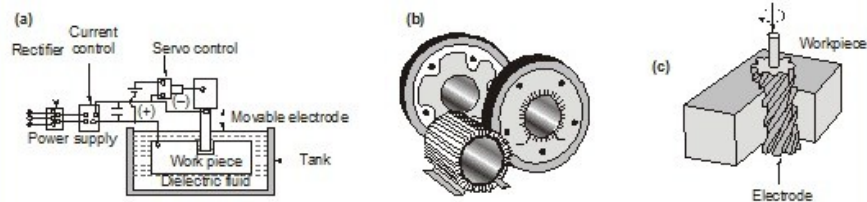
(a) The electrical-discharge machining process (b) Examples of cavities produced by the electrical-discharge machining process, using shaped electrodes (c) A spiral cavity produced by EDM using a slowly rotating electrode, similar to a screw thread
